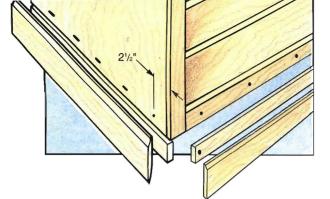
The elonyated screw hole locations in the sides and the mounting holes in the bottom face frame rail are for securing the carcase to the base.
